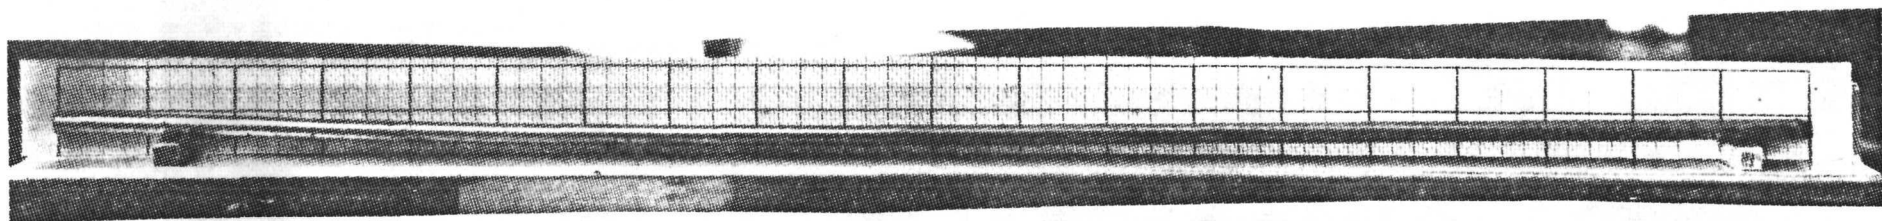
Bowing Measurement in a Lower Pin Section.
